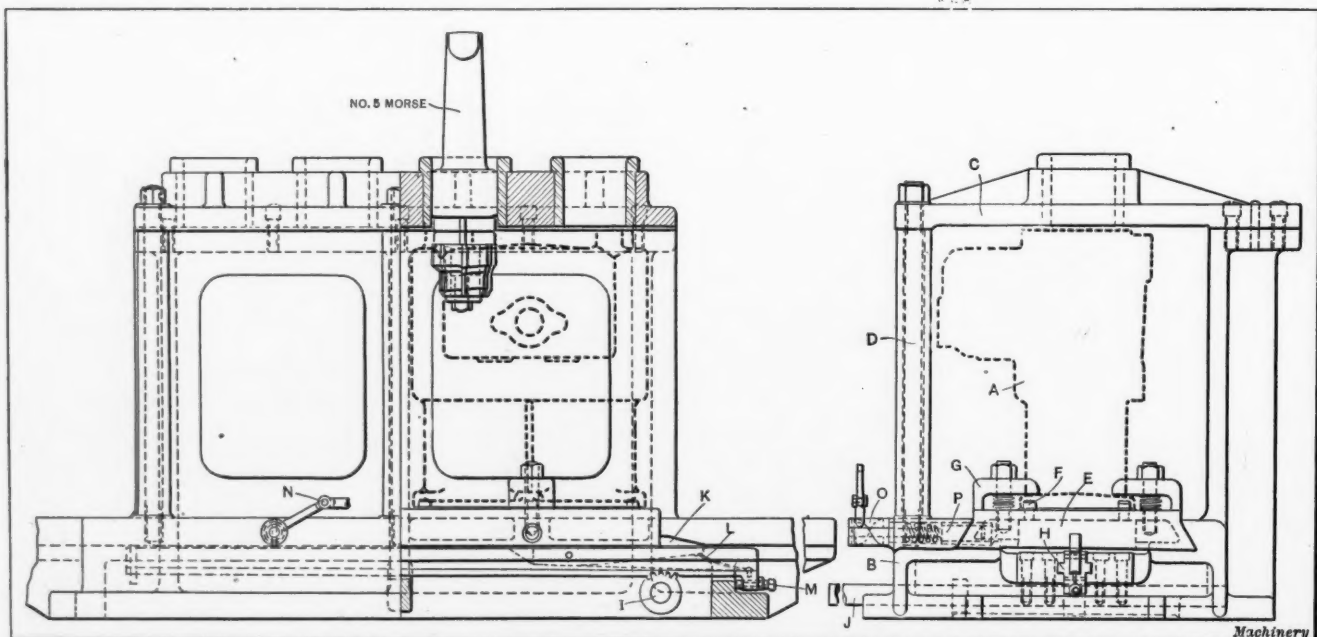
Rough- and Finish-boring Fixture for Inlet Valve Chamber Seats used in the Machine shown in Fig. 10
